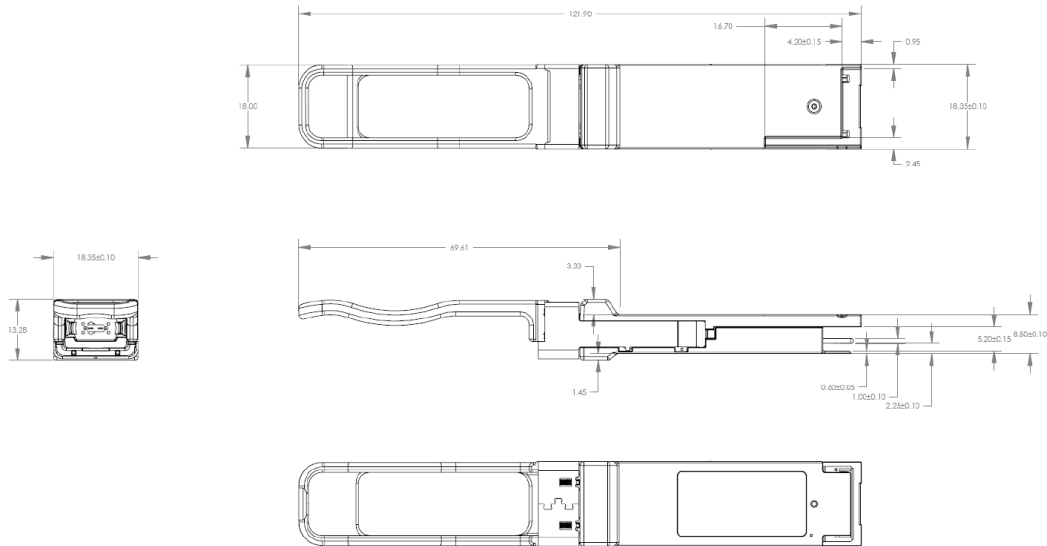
QSFP+ MSA package and its mechanical dimensions [mm] [10]
